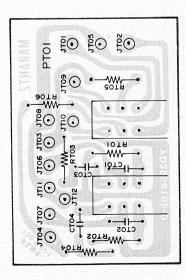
Loudness and Monitor Assembly (PT01) Component Locations
